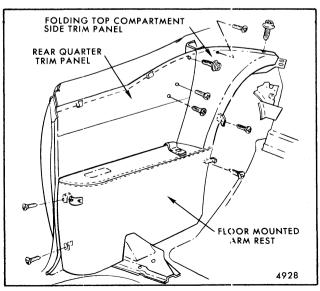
Quarter Trim Assembly Attachment - Convertible Styles
